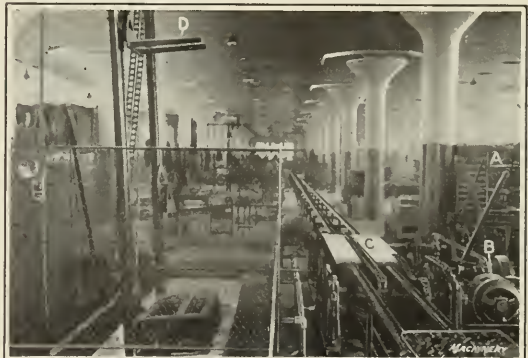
Combinations of equipment are often necessary. This view in the Detroit Wire Spring Co.'s shops shows a conveyor and elevator. Assembled cushion springs are carried to the crating department, where they are packed, and the elevator carries crates to shipping department
